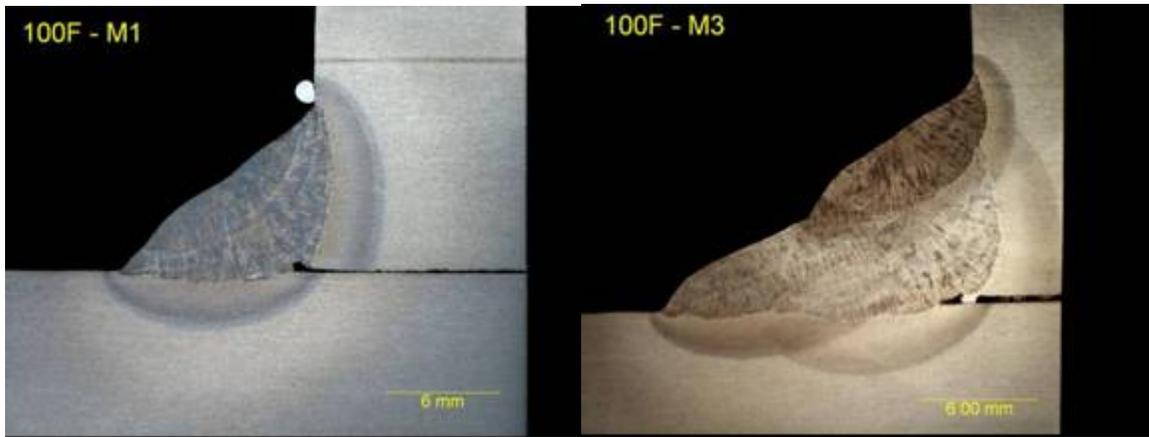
Macros of FCAW Welds on X100 Pipeline Material
